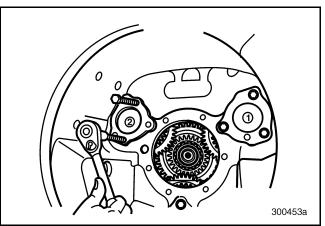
Removing No. 2 Front Countershaft Front Bearing Cover
